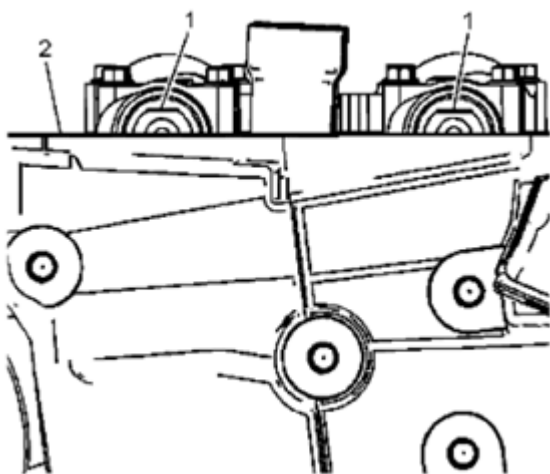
Identifying Crankshaft Rotation Socket
